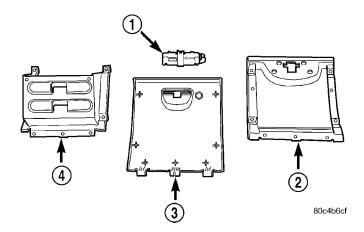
GLOVE BOX ASSEMBLY BREAKDOWN
